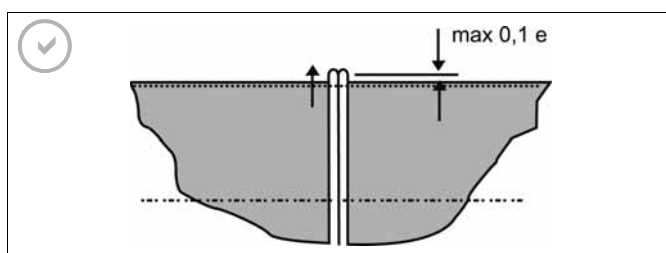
Butt-welding with acceptable wall misalignment
